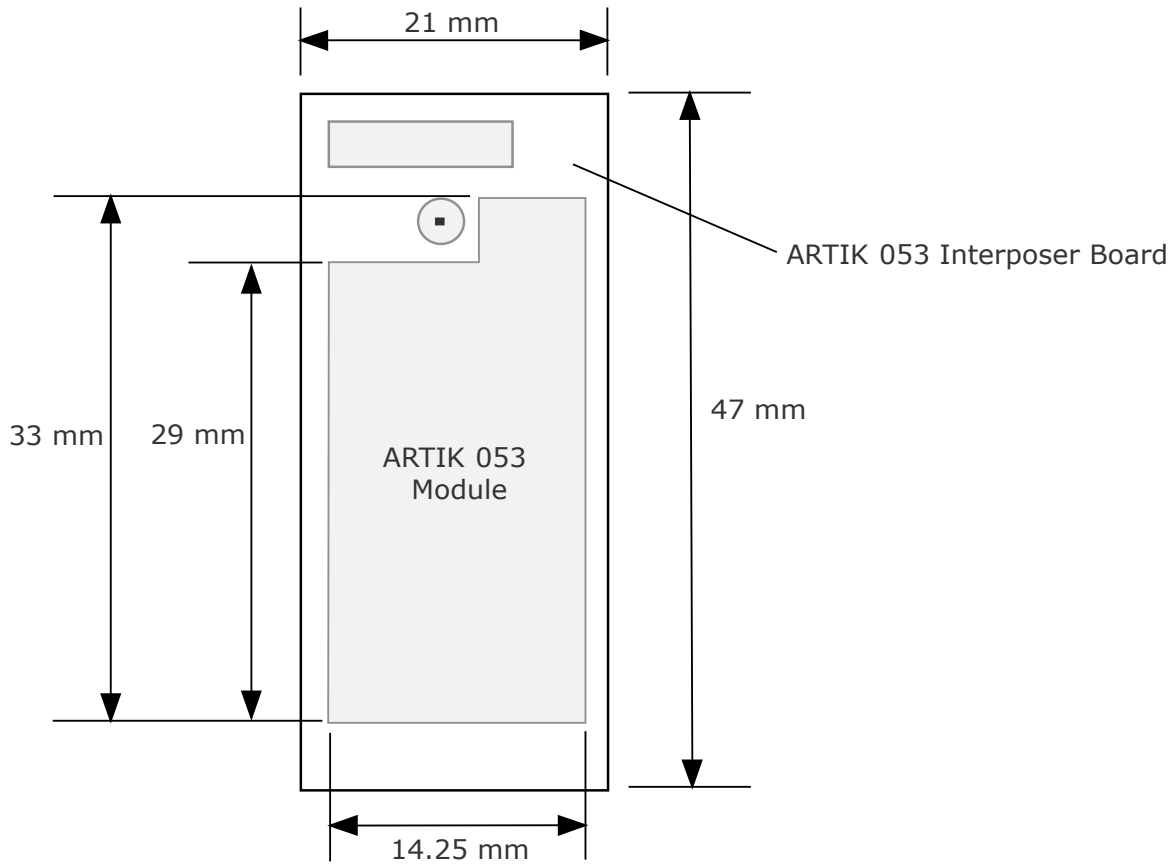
ARTIK 053s Interposer Board and Module Mechanical Specifications
